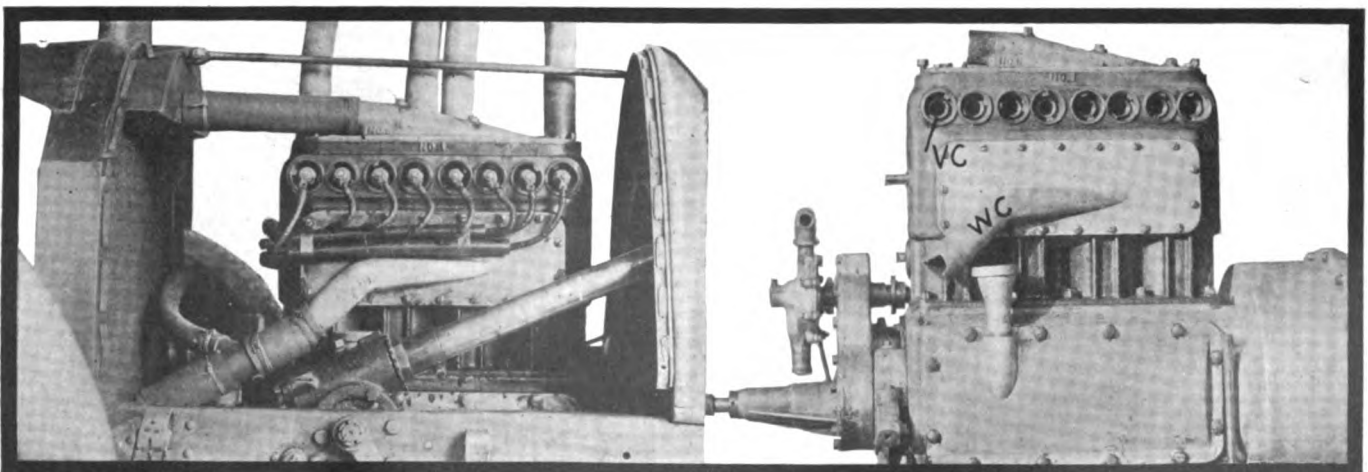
Left side of Duesenberg-Mason motor, showing spark plugs mounted horizontally in plugs in the sides of the combustion chambers. The large water connection pipes appear
